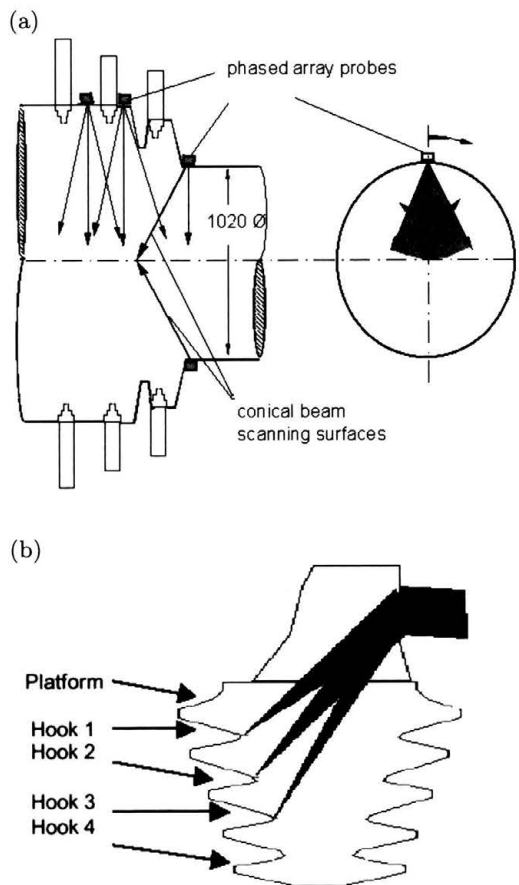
Turbine inspection using phased array. Turbine ring inspection (a) and turbine blade inspection (b).
